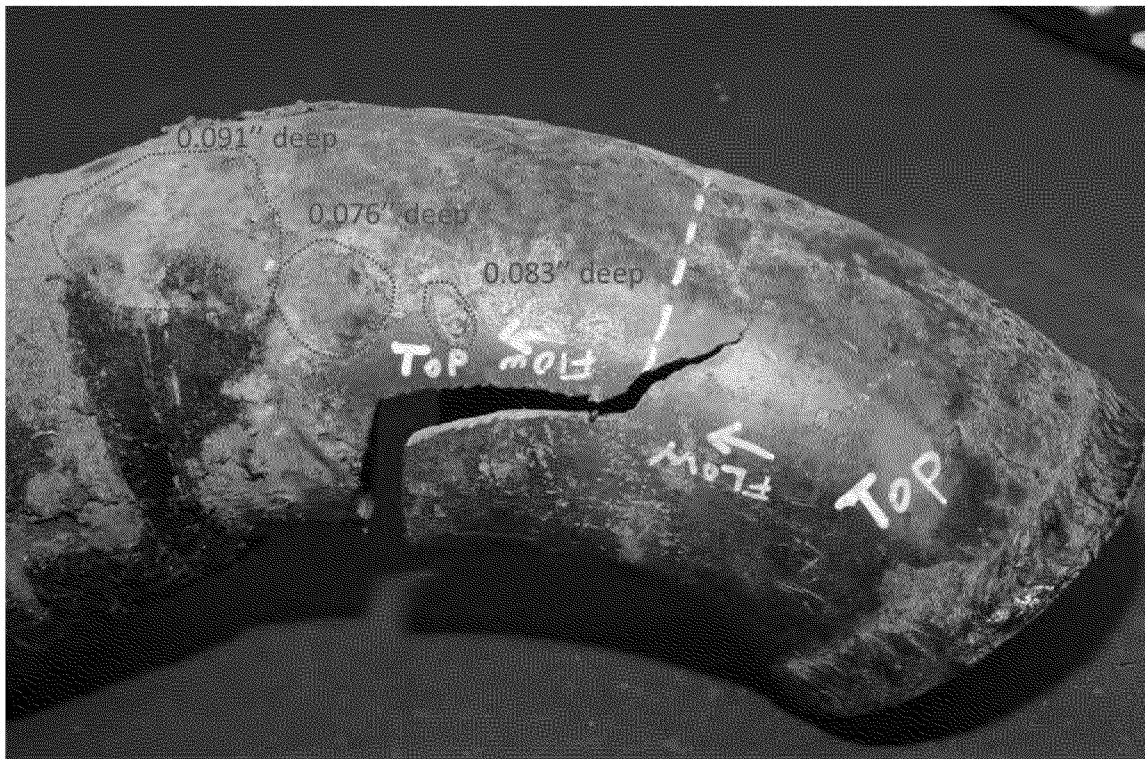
Photograph of the fractured elbow with pipe coating removed showing several corrosion pits, with their depths indicated.
